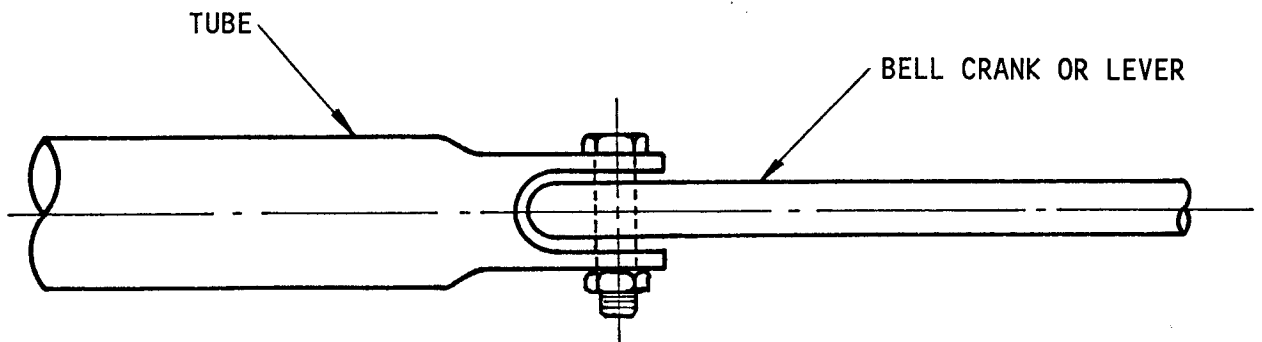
Bell Crank or Lever Assembly Connection of Fabricated Flight Control
